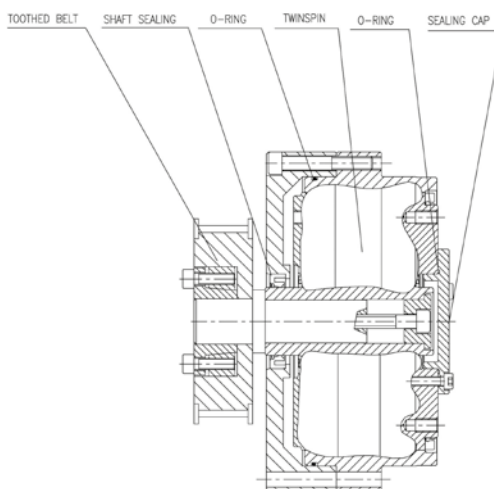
Connection of reduction gear with toothed belt
